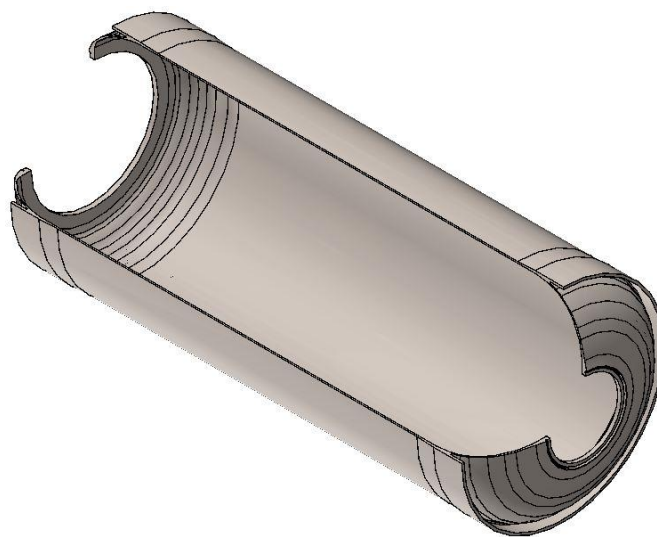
3D model of the Solid-fuel rocket engine body (Solidworks)
